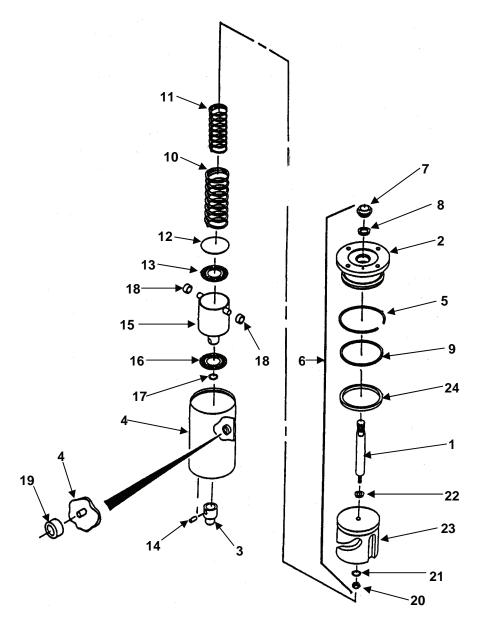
Butterfly Valve w/Actuator Lower Section. (Model ROWPU-1 only)
